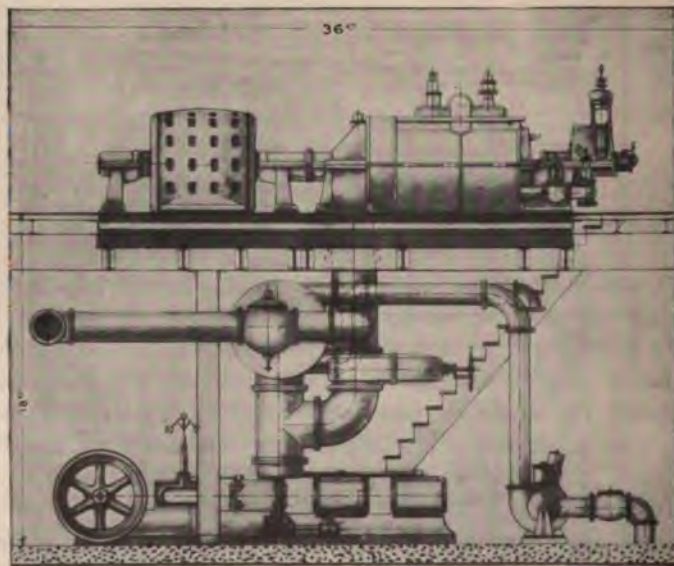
POWER-HOUSE CONTAINING FOUR 1000-KW WESTINGHOUSE-PARSONS STEAM TURBINES AND CONDENSERS, SIDE ELEVATION
